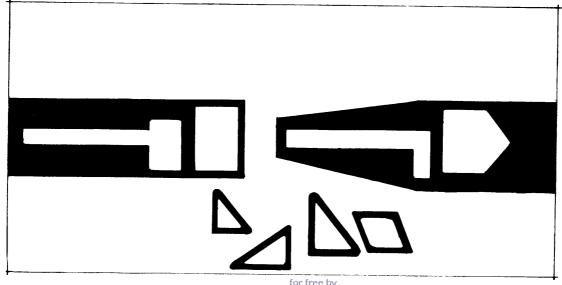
Printed board of LV1/432. All components and soldering posts are installed on the p.c.board. Black areas to be removed by etching. P.c.board dimensions  $145 \times 71 \text{mm}$ .
